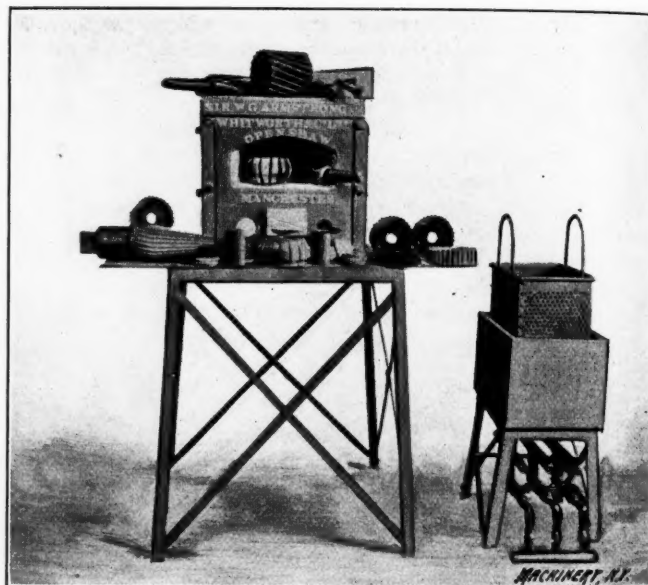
Muffle Furnace for Hardening Milling Cutters made of High-speed Steel; also Tank and Dipping Cage for Tempering them in Oil.
